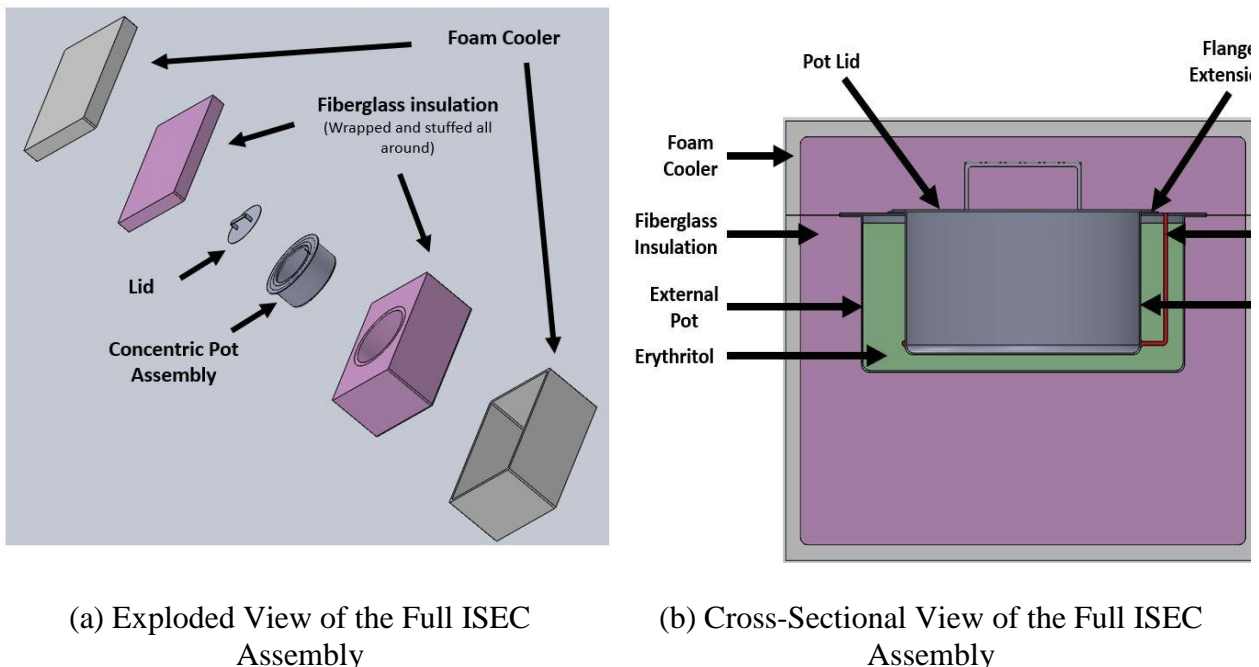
The Full ISEC assembly of the first prototype with labeled major components and subassemblies
